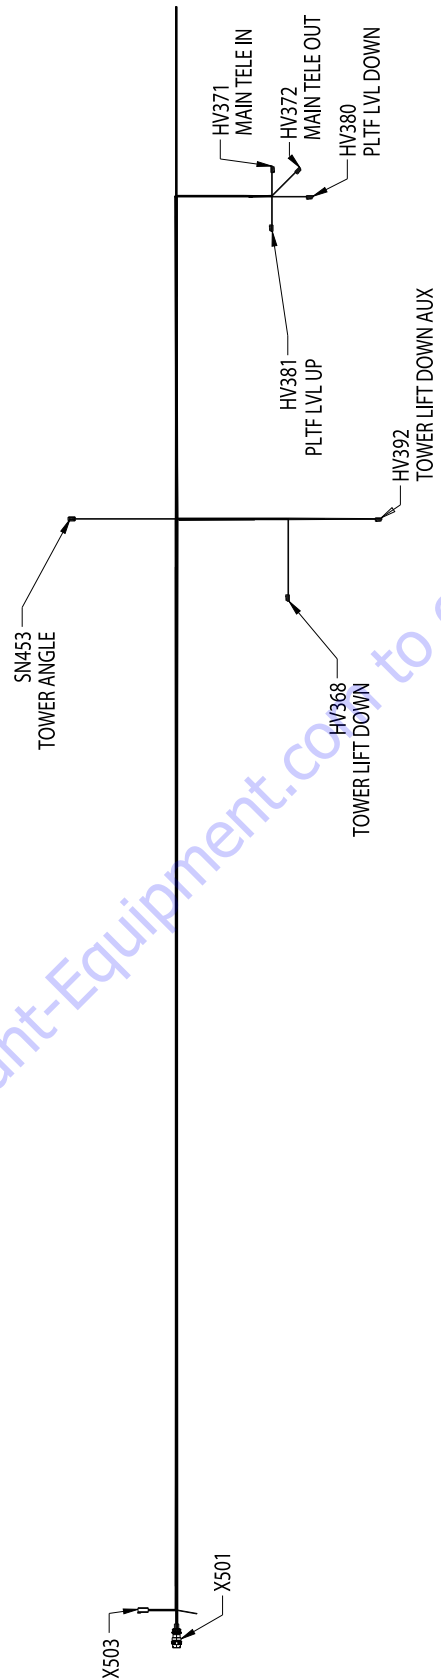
Main Valve Harness - Sheet 8 of 8
